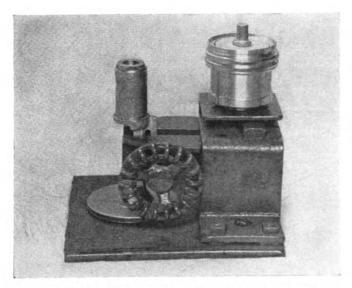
Device for holding service and emergency pistons while removing or applying the piston-spring nut
